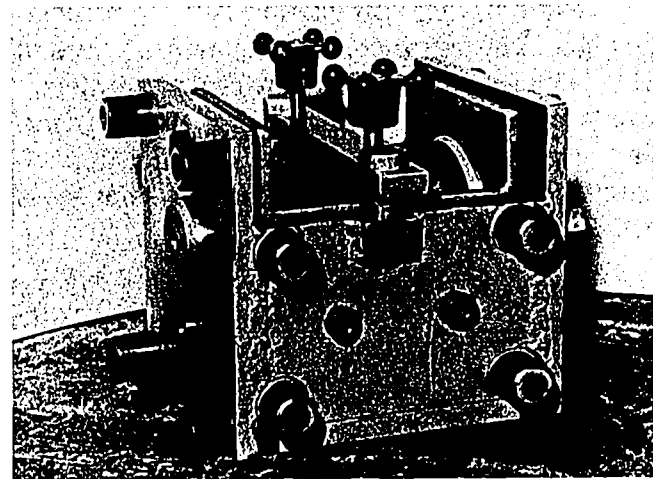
The process of tooling-up includes getting the fixtures that are needed to hold the work on a machine.
